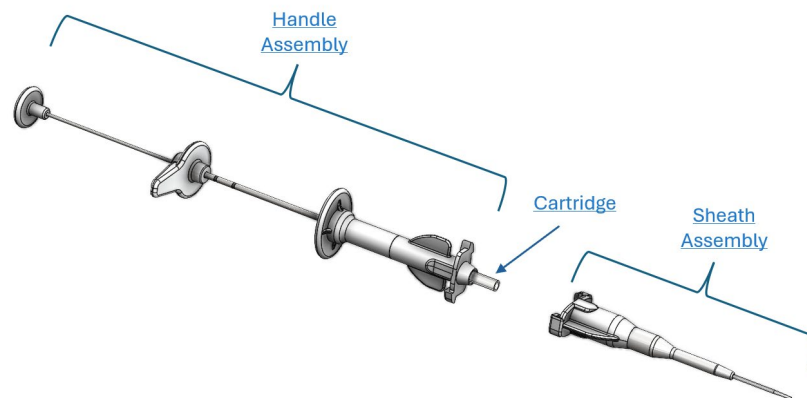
DLAD Sheath Assembly Cartridge and Handle Assembly
